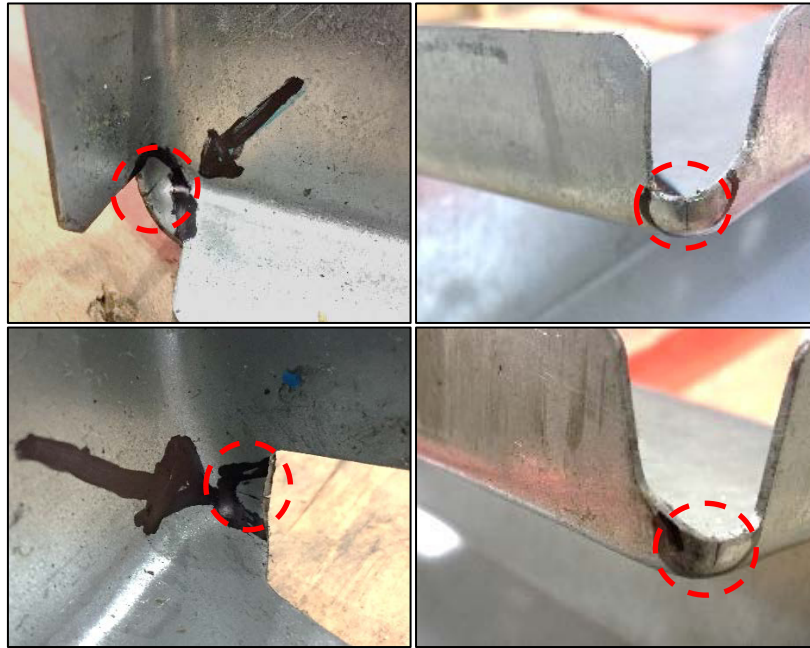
Edge cracks observed in the component manufactured with DP steel grade.
